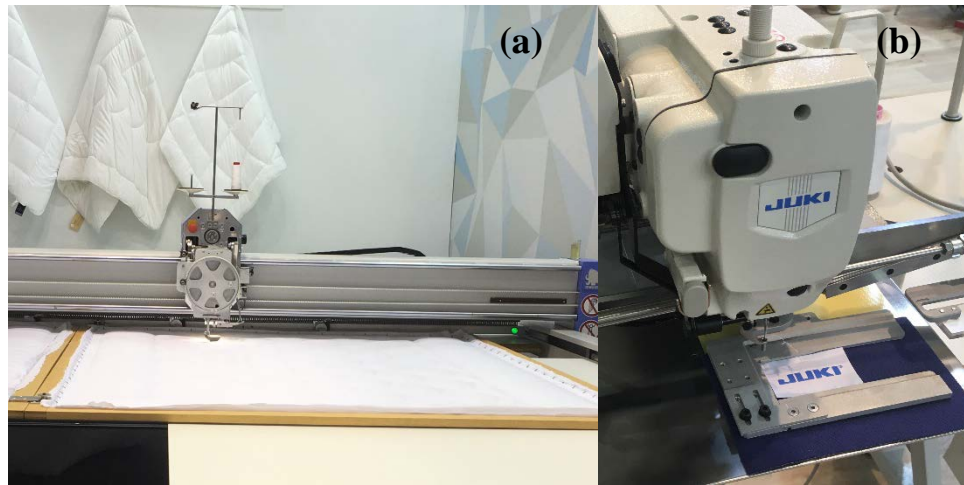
Quilting machine by Mammut (a) and label attaching machine by Juki (b)
